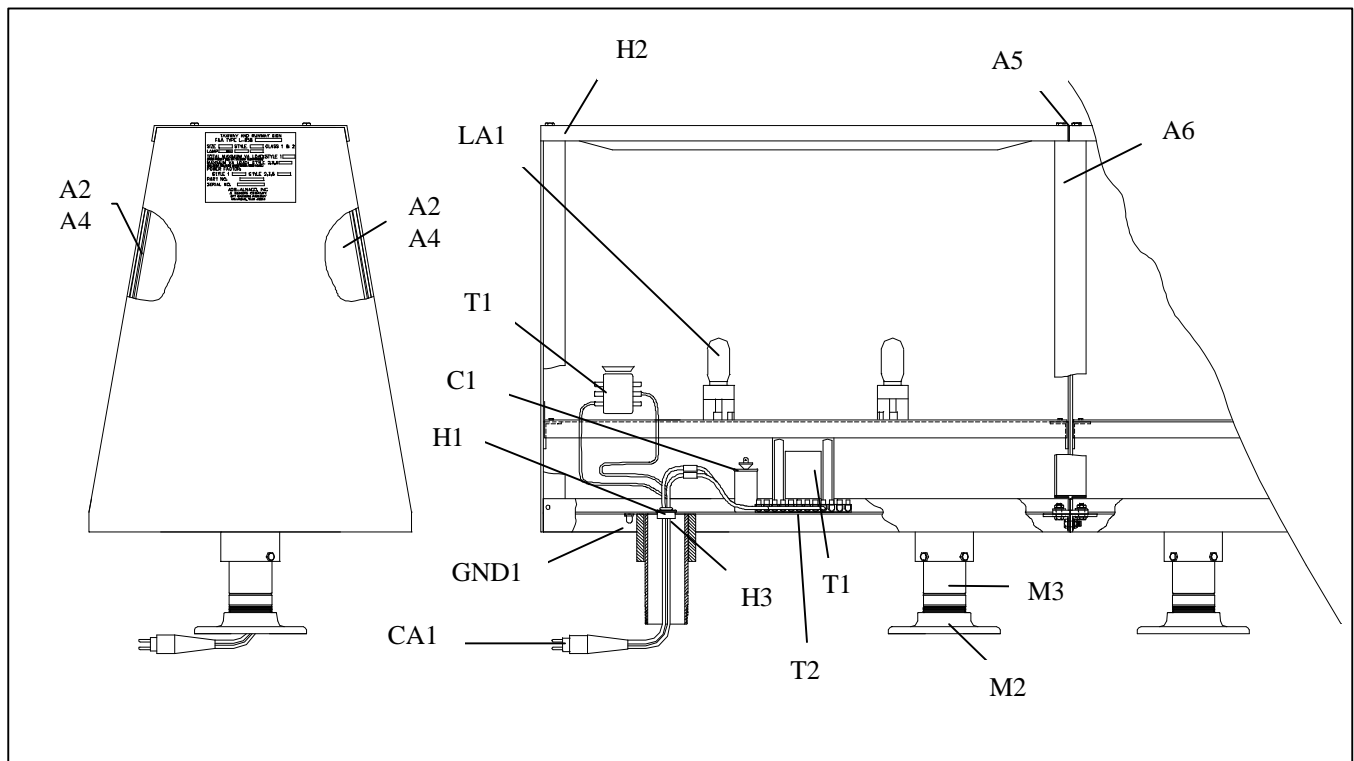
Cross-Sectional View of L-858 Sign Module Assembly (Sizes 1, 2, 3, Multiple Modules)
